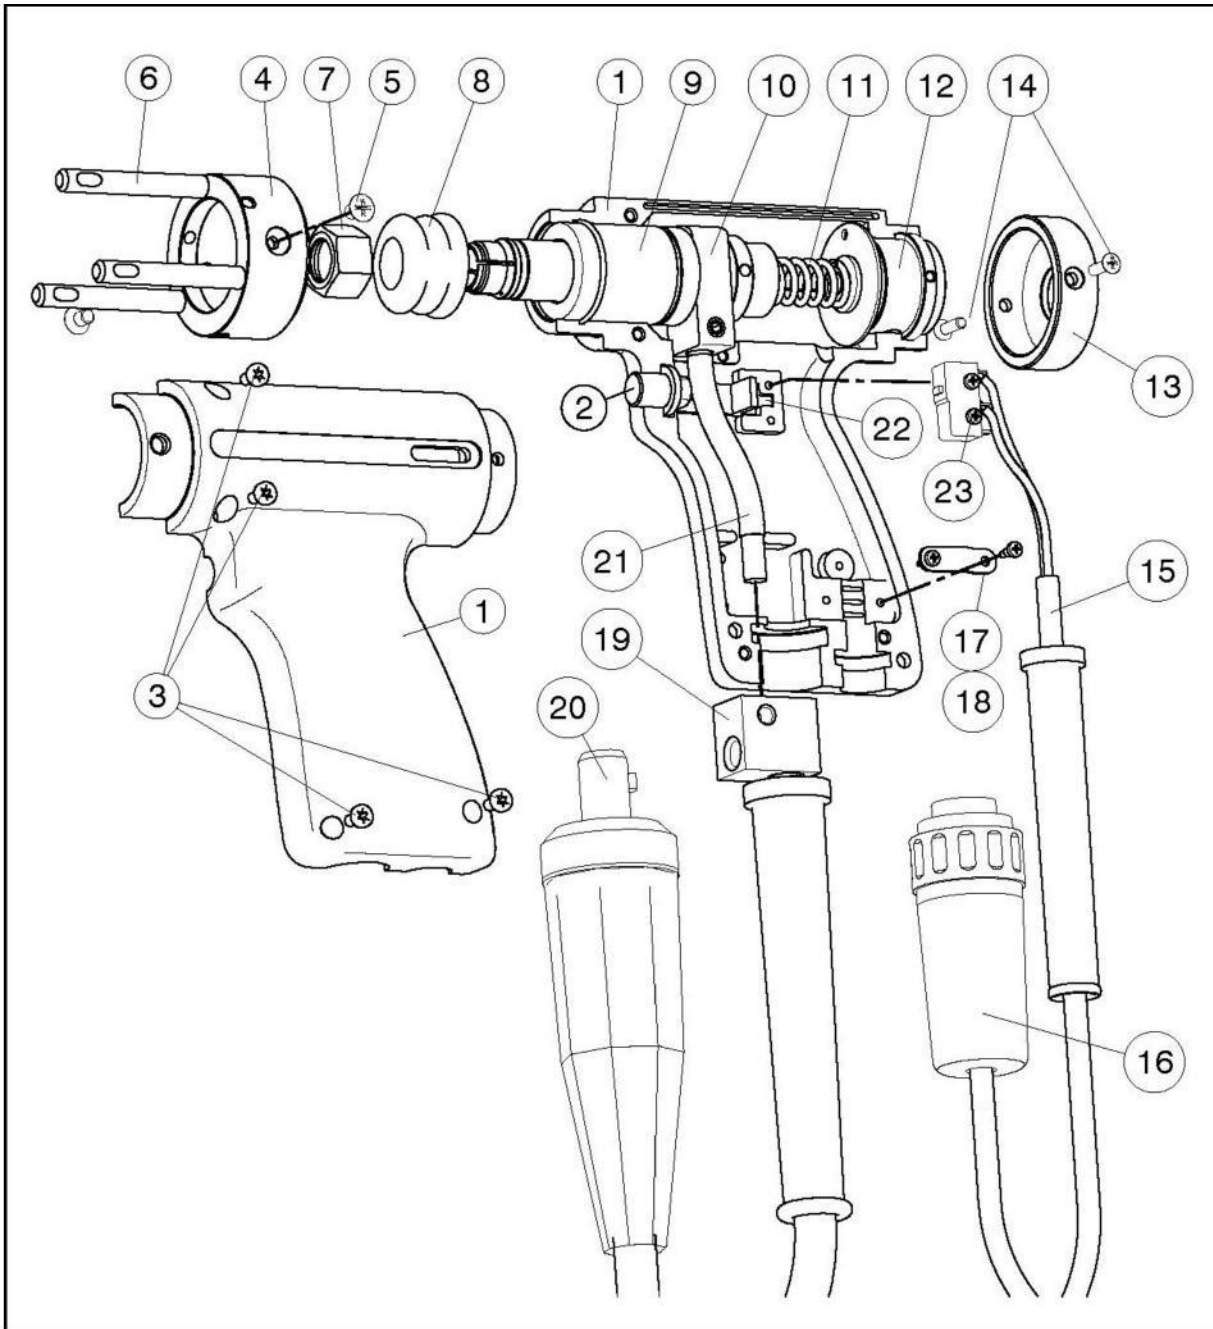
Detailed view of the ESP 1 K welding gun (contact welding)
